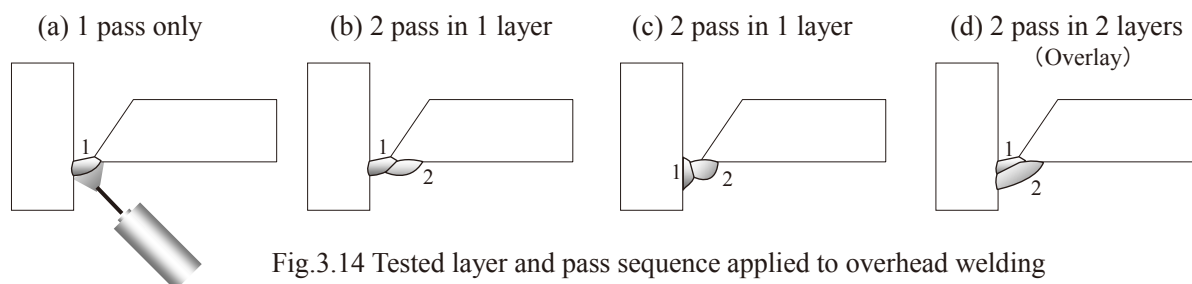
Tested layer and pass sequence applied to overhead welding
